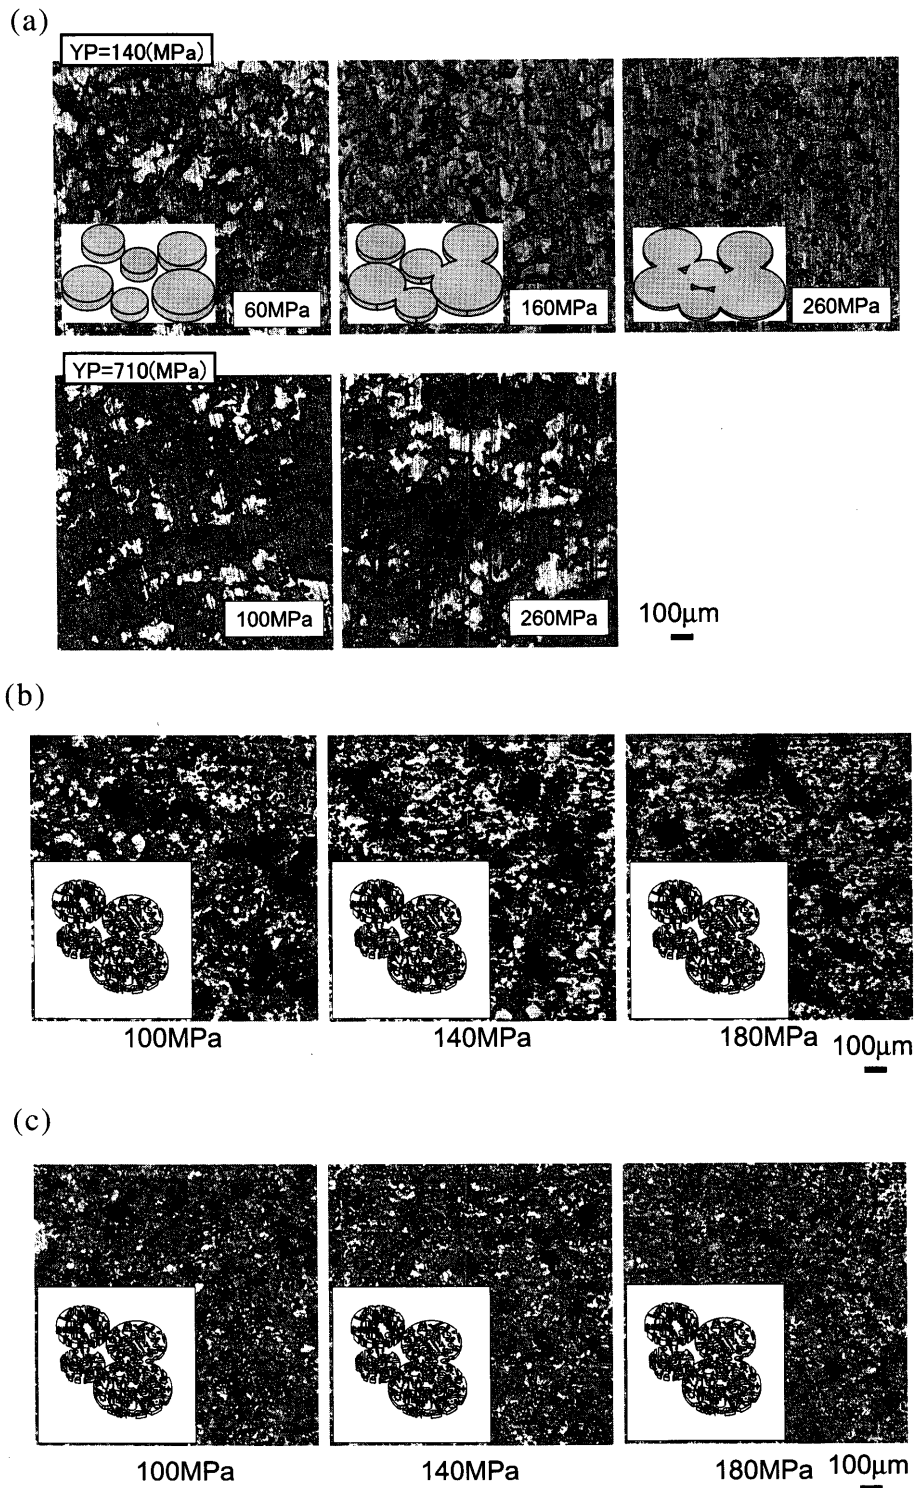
Surface morphologies of steel sheets and the schematic drawing after the forming test with different conditions. (a) Cold, (b) galvannealed steel sheet (GA), (c) organic lubricant film coated GA (GA-R).
